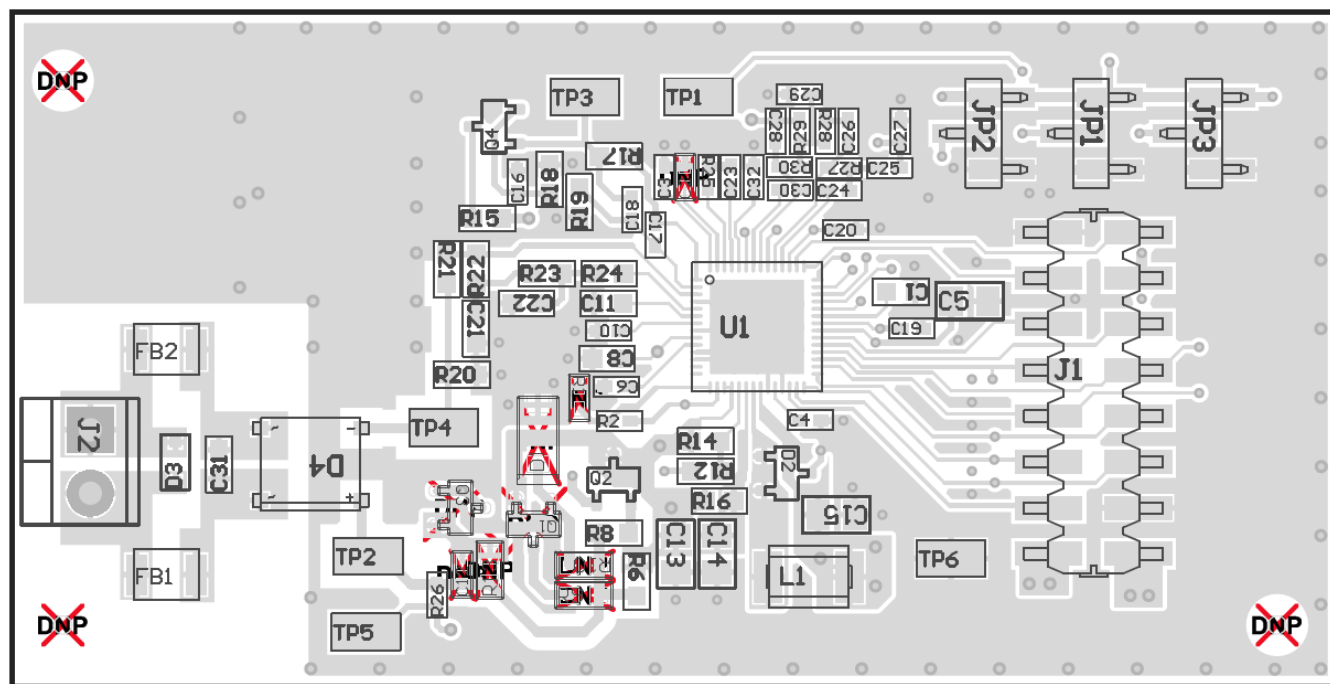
BOOST-DAC8730-HART PCB Components Layout
